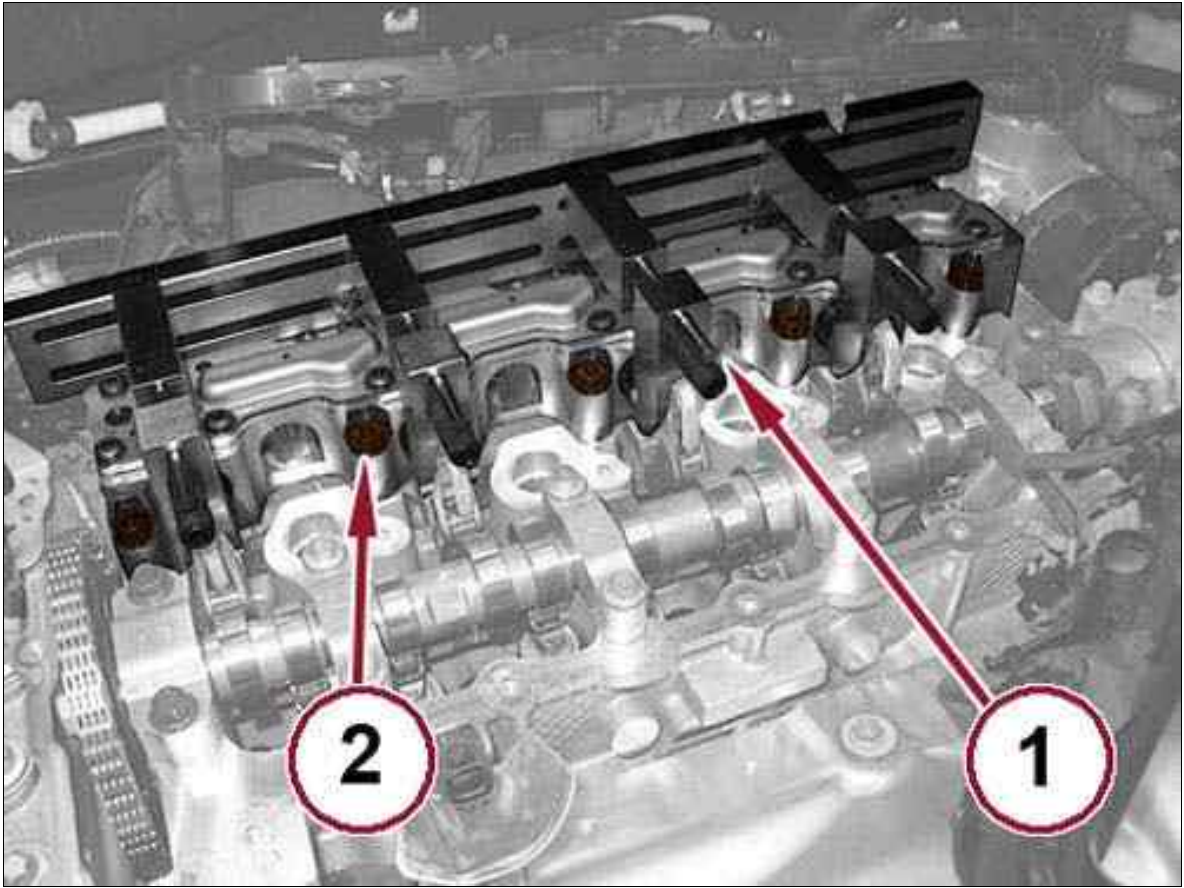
Rear MULTIAIR Actuator To Cylinder Head Bolt
